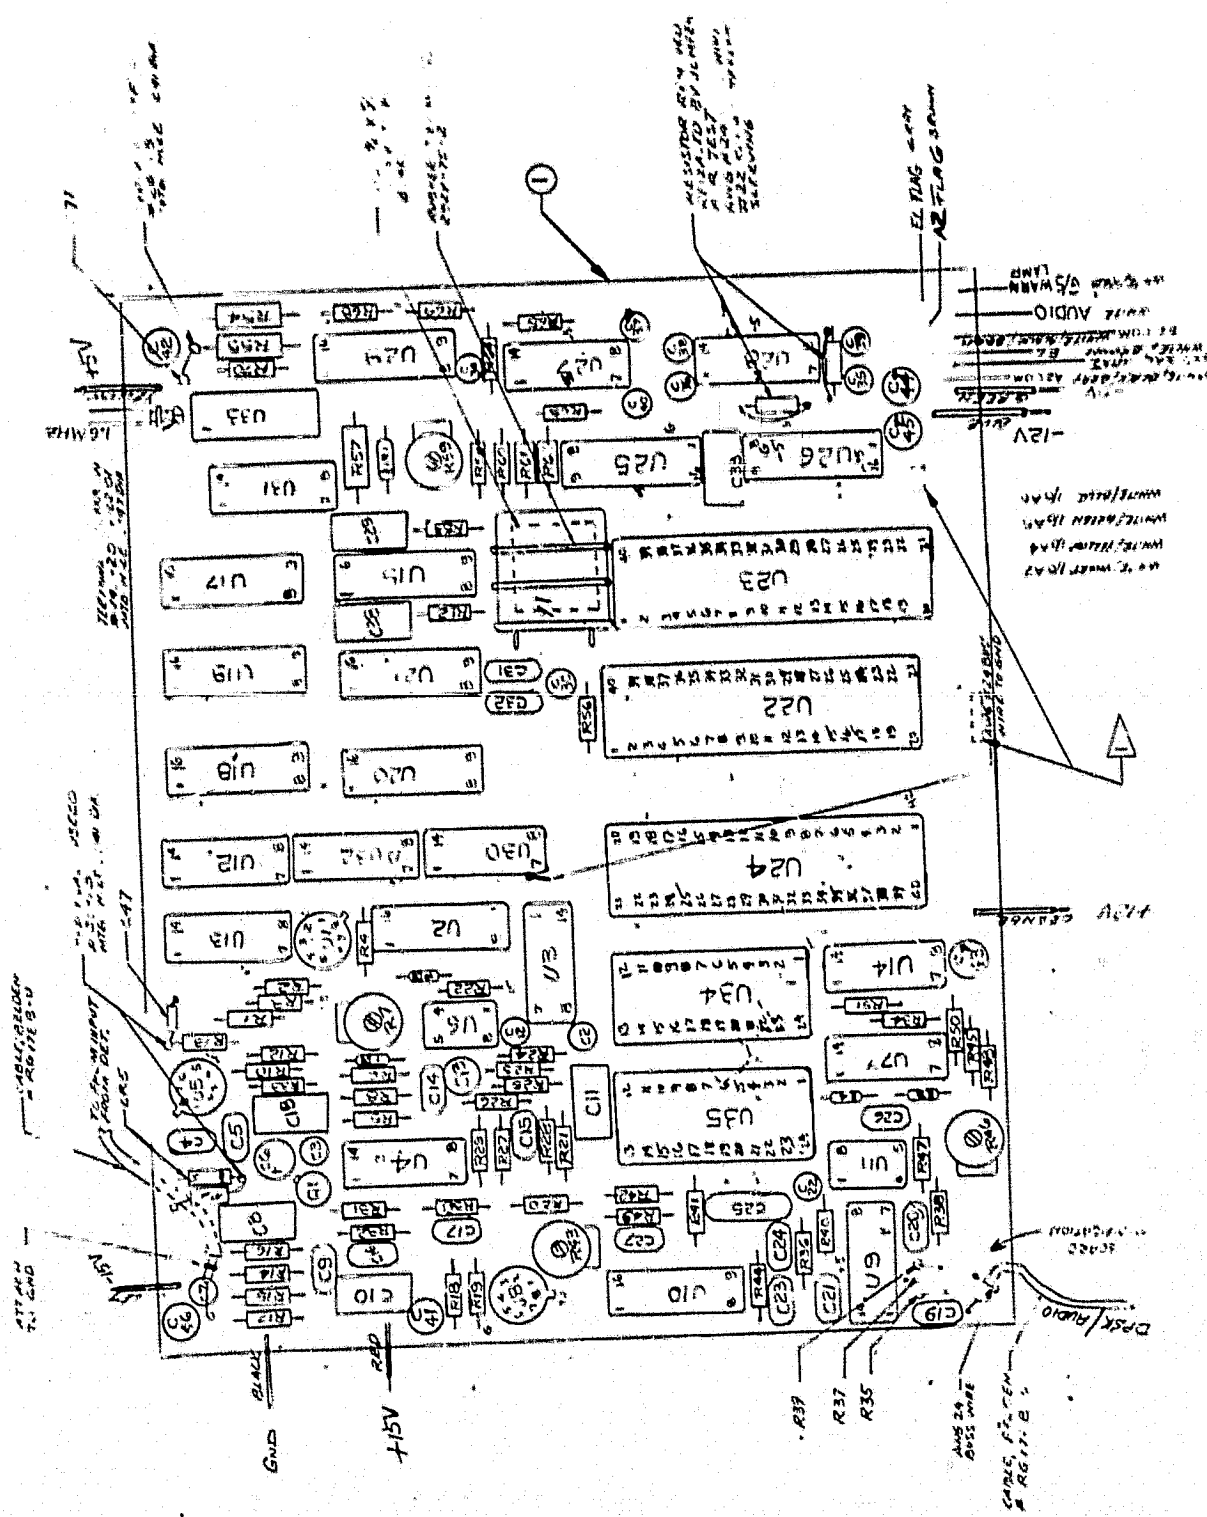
BOARD ASSEMBLY, PROCESSOR
